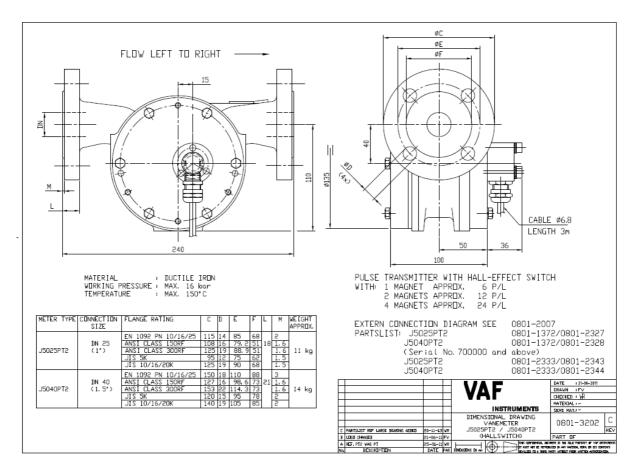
Dimensions Flowmeter J5025PT2 and J5040PT2
